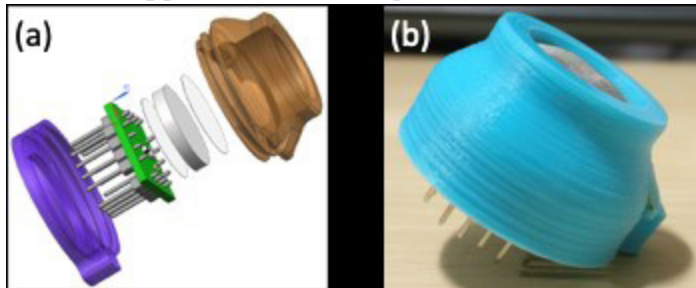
(a) 3D rendering of package (b) Final packaged oxygen sensor
